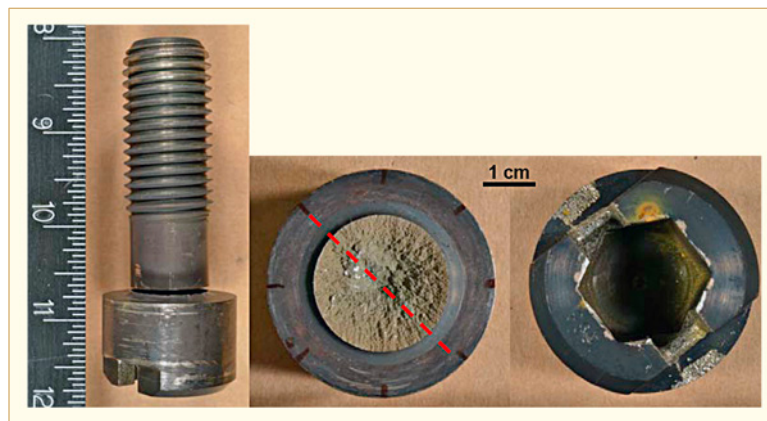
Bolt 120°-6 side view (left), open fracture showing lighter macro appearance (center), and opposite side of head (right). Bolt head photos match in-service position.
